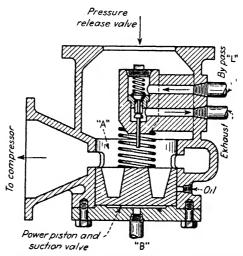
Power piston operated by solenoid valve. (Courtesy of Allis-Chalmers Manufacturing Co.)
